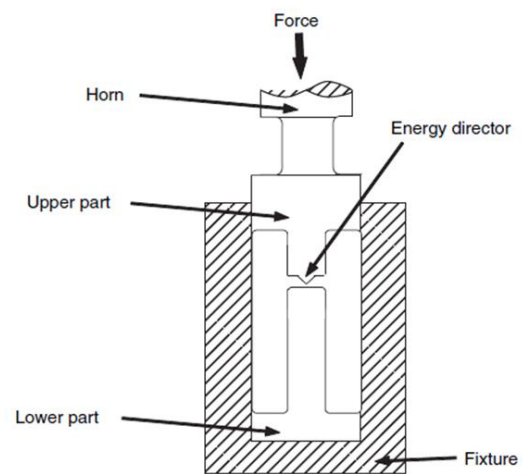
Parts for ultrasonic welding with triangle energy director
